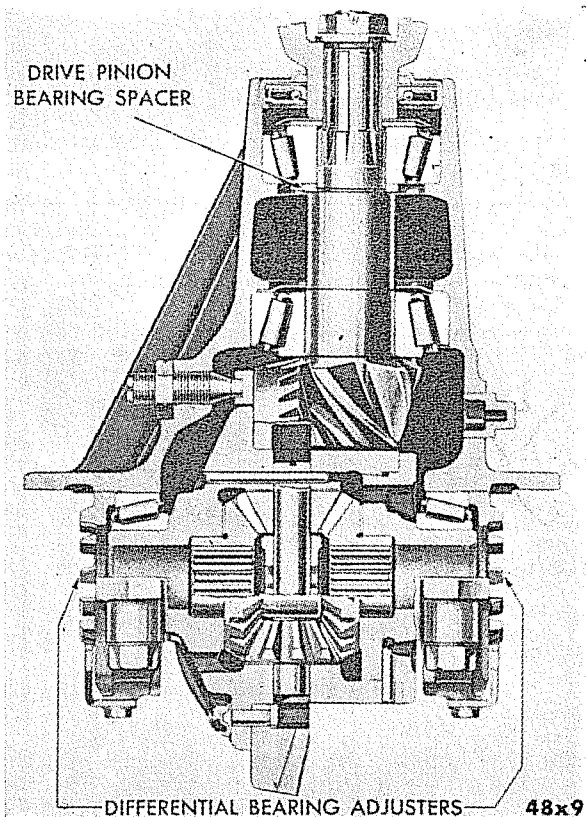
Rear Axle Differential (Assembled View) 2-26A, 2-33A.
